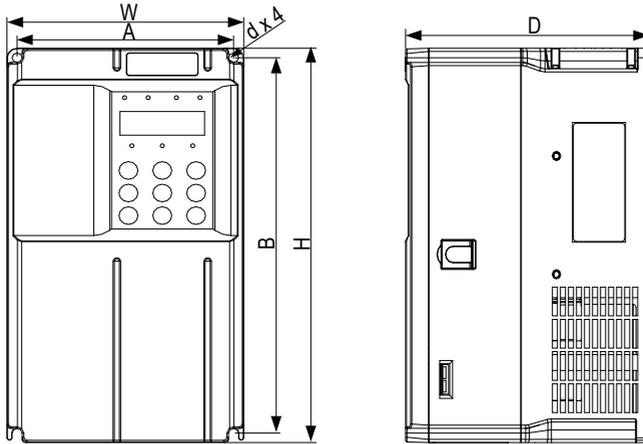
Overall and mounting dimensions of MD290T0.4G/0.7PB to MD290T37G/45P(B) and MD290-2T0.4G/0.7PB to MD290-2T18.5G/22P(B)
